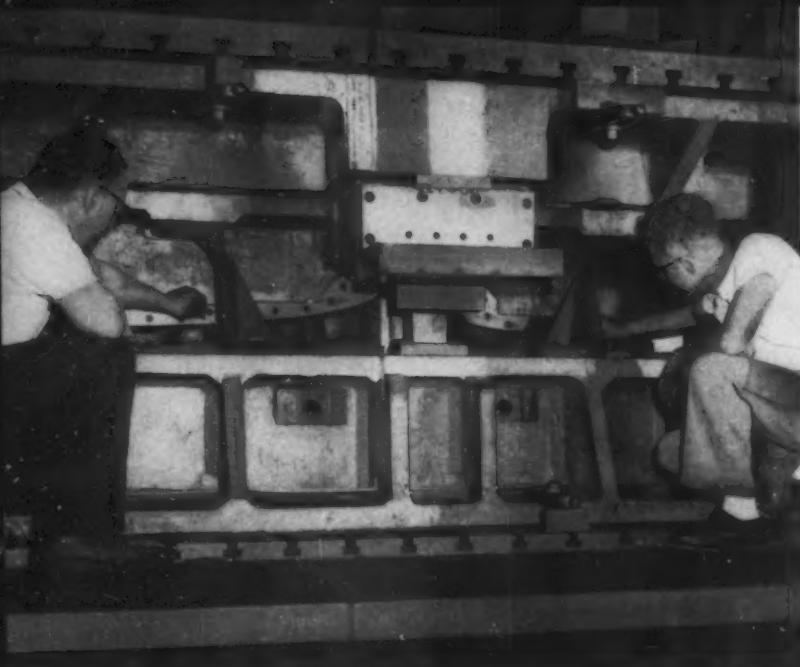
Checking the timing of the cams and alignment of the steel inserts on a trimming punch and die for roof panels. Tools are mounted on a 30-ton spotting press.
